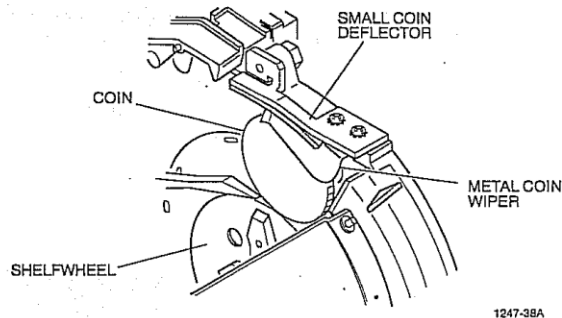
Hopper Metal Coin Wiper Adjustment – Small Coin.
